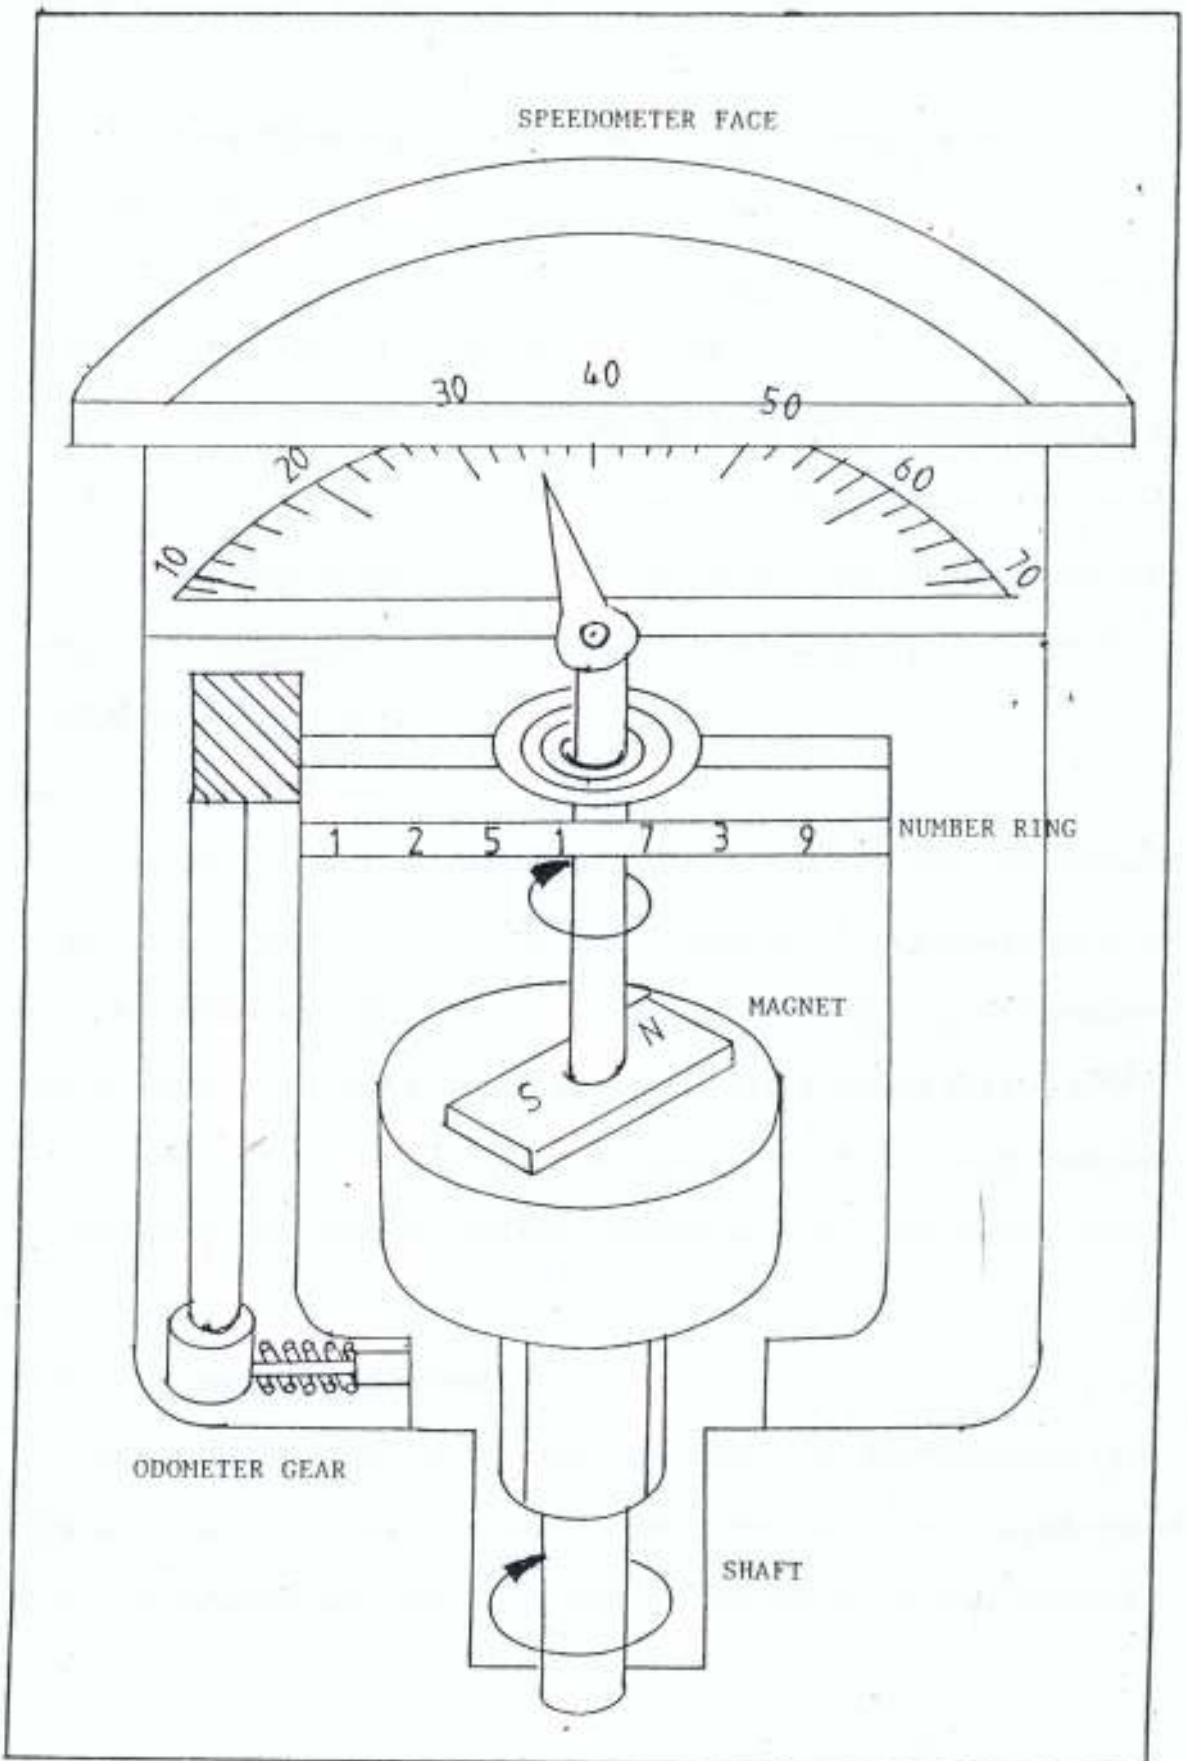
A SPEEDOMETER - ODOMETER ASSEMBLY
